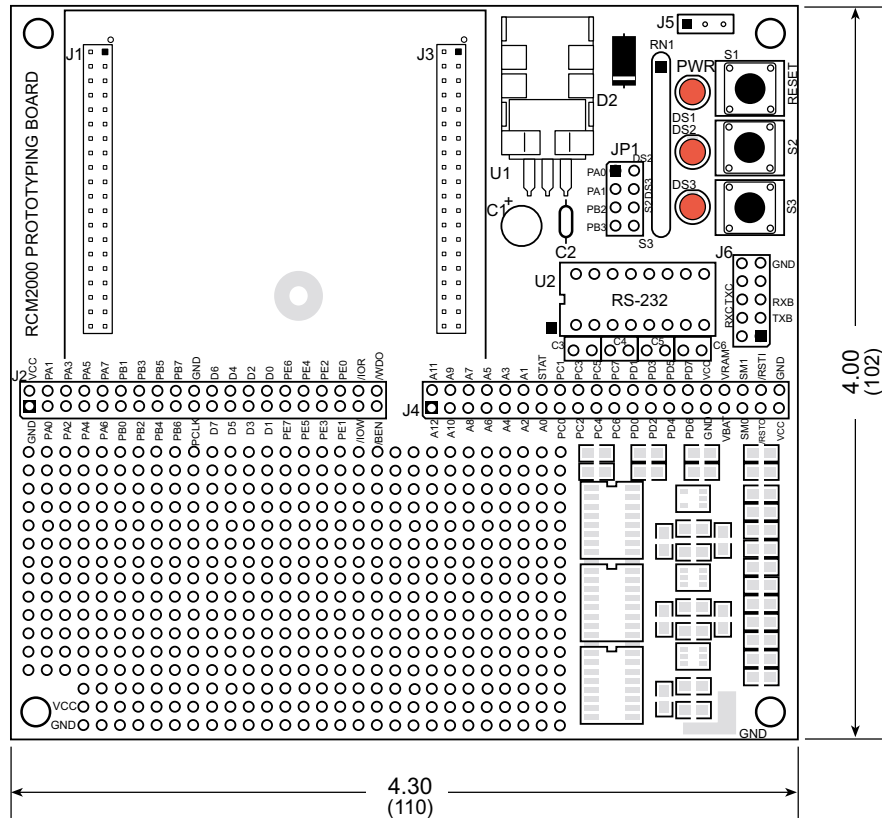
shows the mechanical dimensions and layout for the RabbitCore 2000 Prototyping Board.
